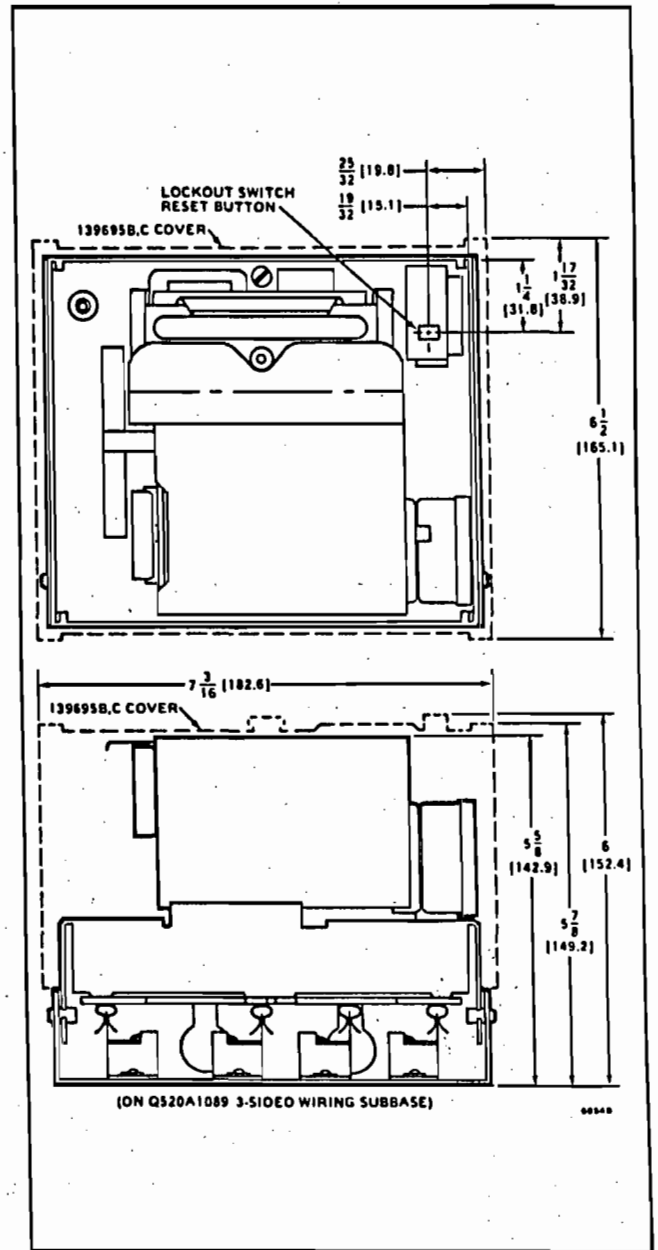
MOUNTING DIMENSIONS OF THE R4140 PROGRAMMER ON THE Q520A WIRING SUBBASE, IN in. [mm SHOWN IN BRACKETS].
